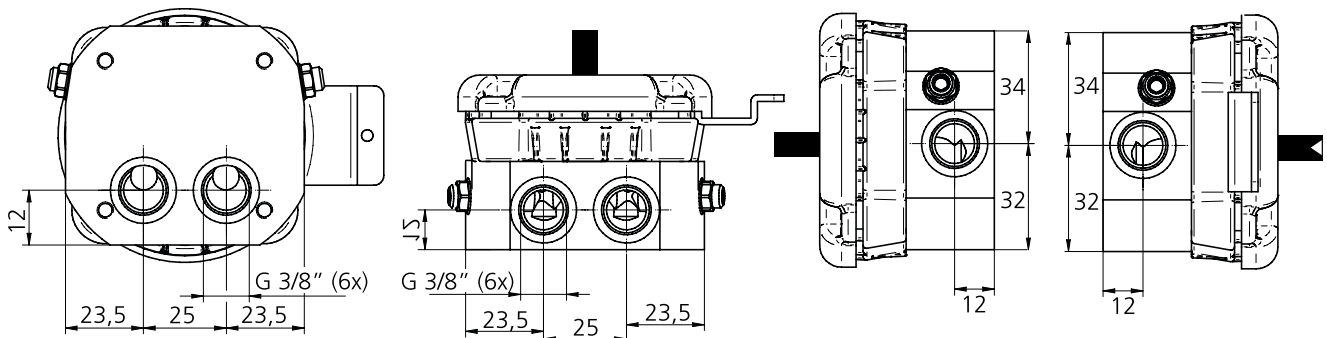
Connections: Six 3/8" connections. Supplied with mounted clamp-ring couplings for Ø 12 mm pipes.
